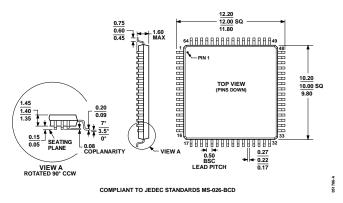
64-Lead Low Profile Quad Flat Package [LQFP]
